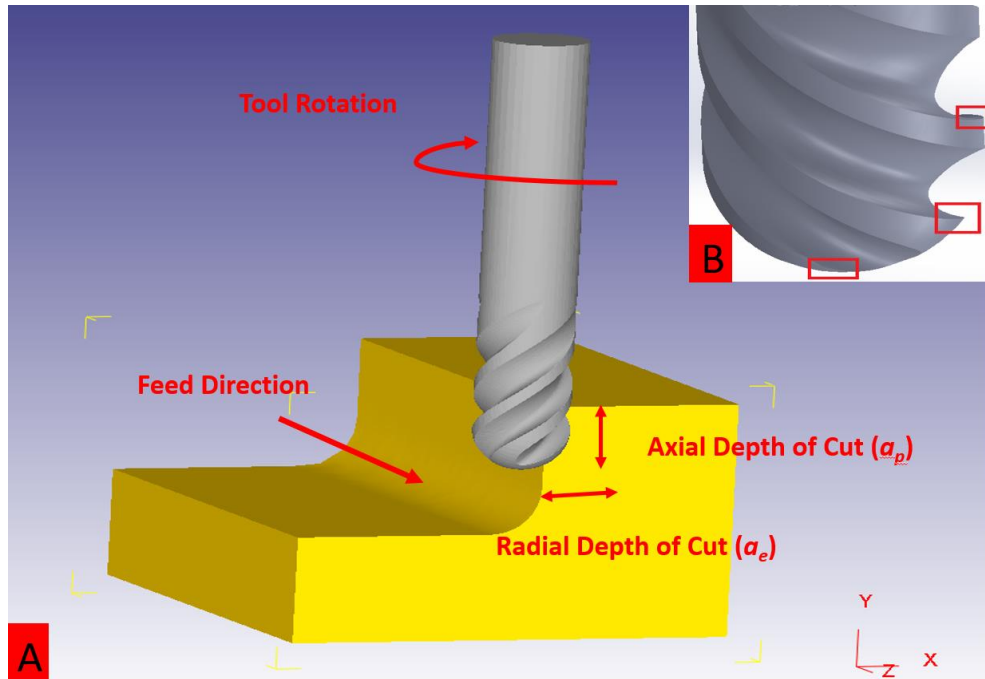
Depiction of cutting tool and workpiece geometry.
